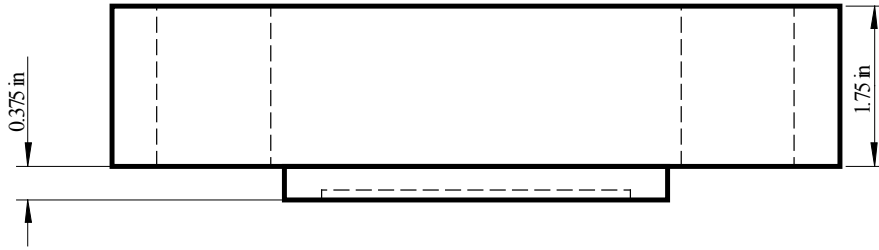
Design drawing of removable flange for double O-ring (outer polymeric-inner polymeric) seal (vessel cap).
